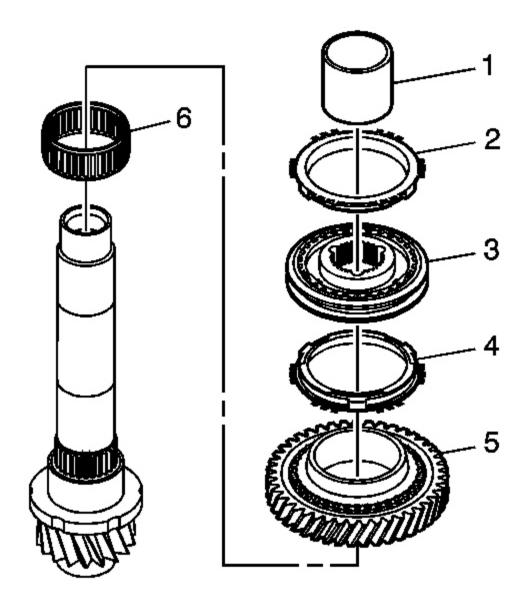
Exploded View Of Reverse Gear Assembly Courtesy of GENERAL MOTORS CORP.
